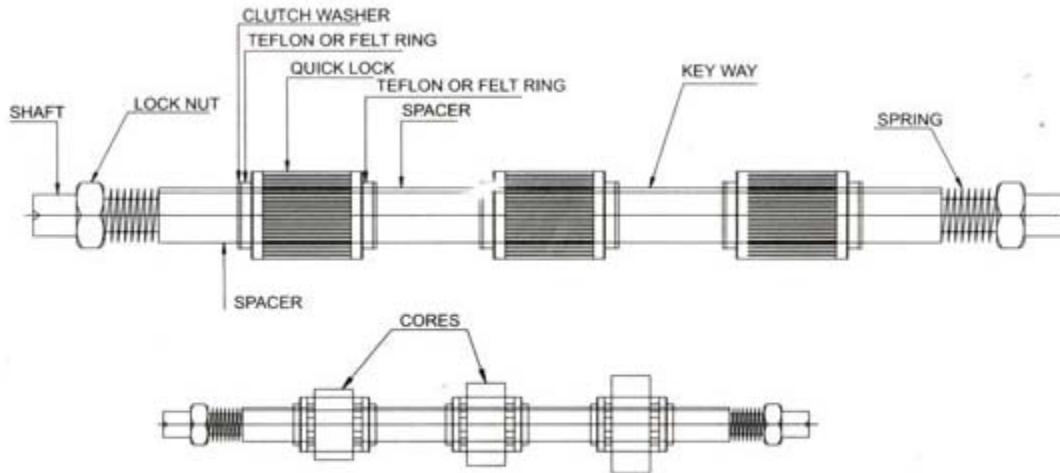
Differential Winding arrangement to avoid slippage problem using Quick Locks, Spacers and Springs
